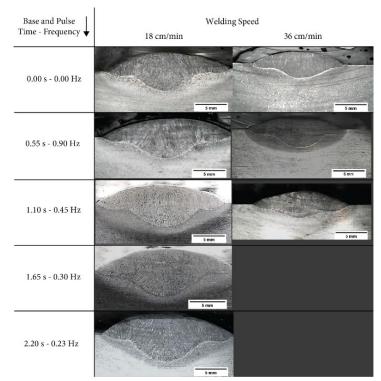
Macrographs of the cross section of the weld beads performed.
